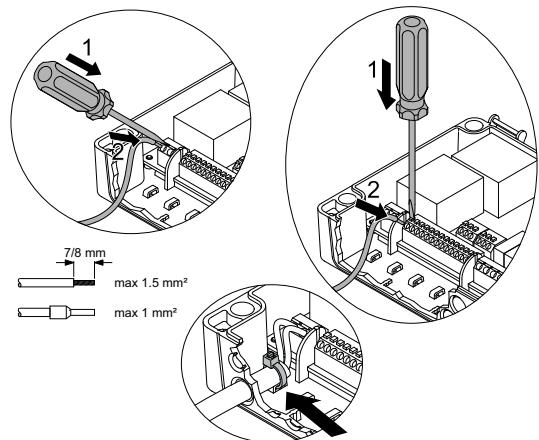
Connecting the cables. Screw driver 0.6 x 3.5.
